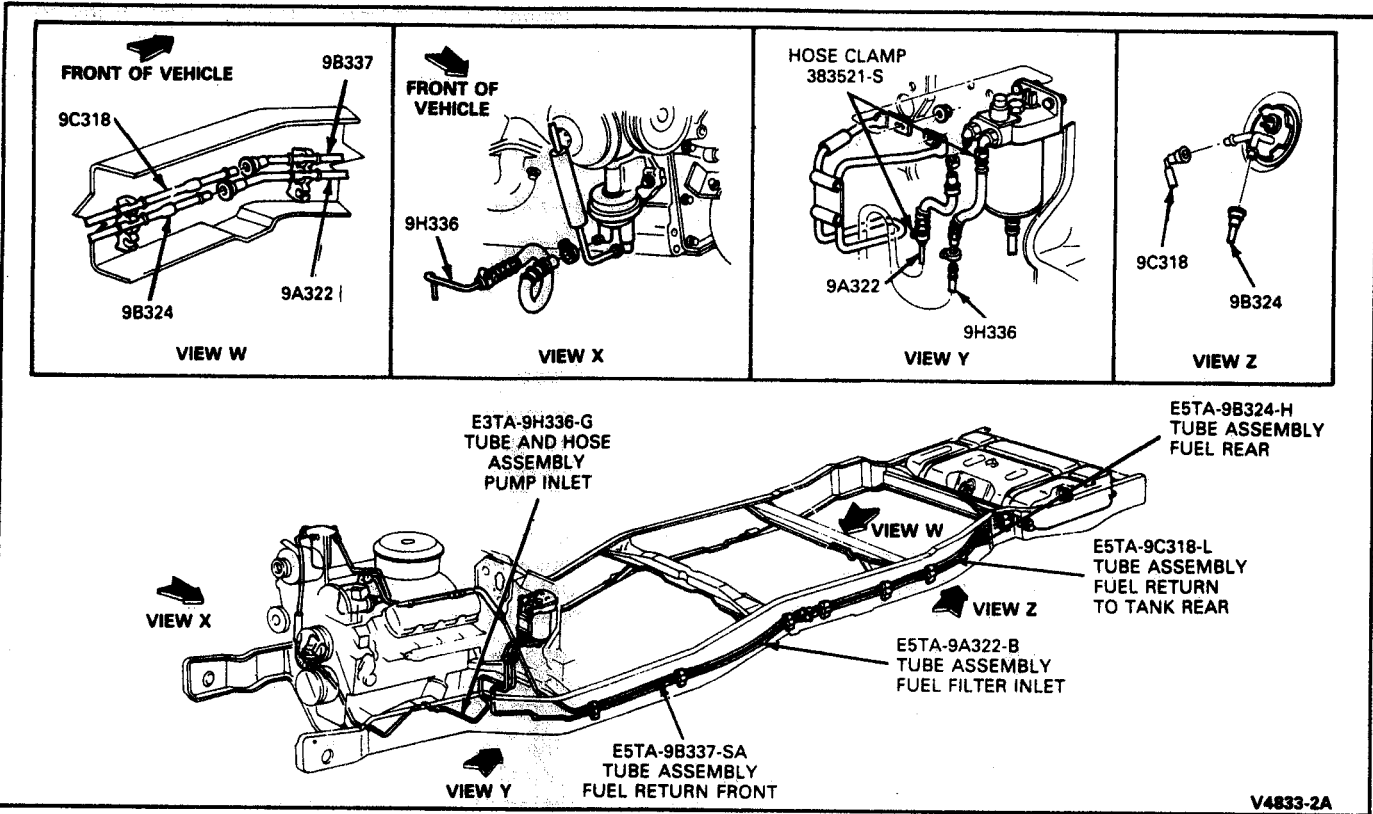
Fuel Line Installation—Aft Axle Fuel Tank, 133 Inch W.B.—F-150—F-350
